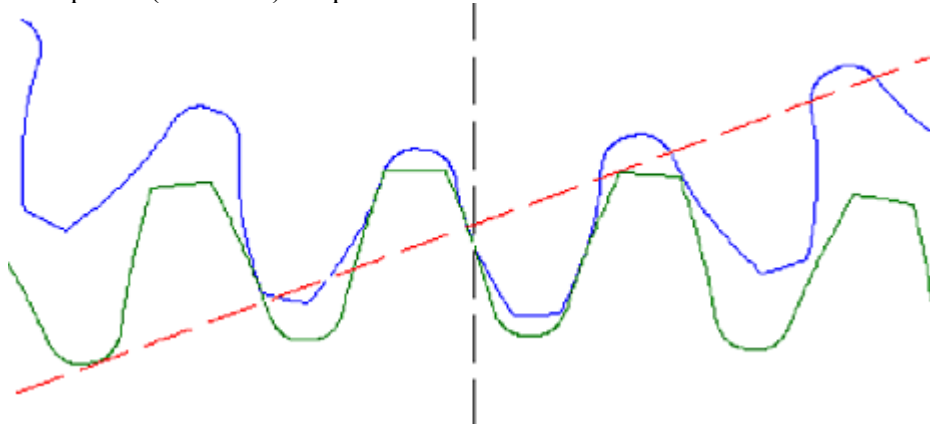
Tooth form of a cylindrical gear pair in 2D
